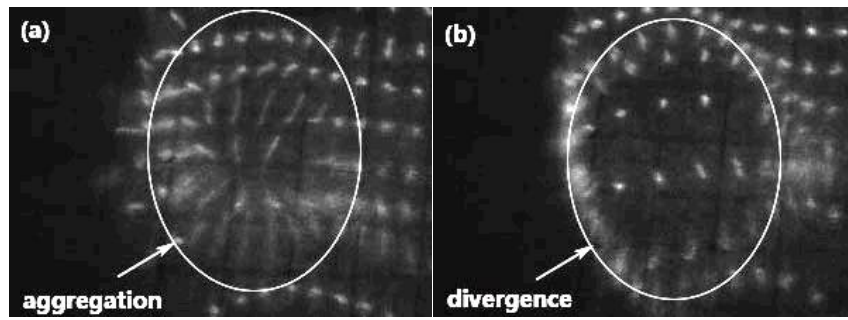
Oscillation mode.(a. weld pool is concave; b. weld pool is convex)
